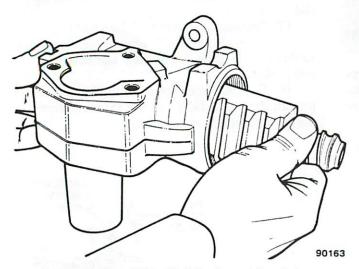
K-5 Wormshaft and Ball Nut Removal/Installation
